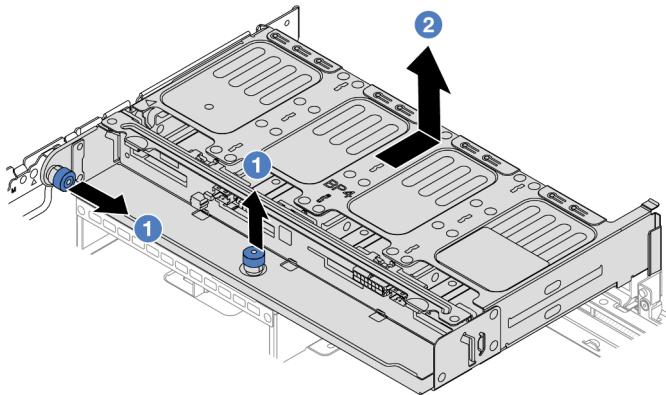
Removing the 8 x 2.5-inch rear drive cage
